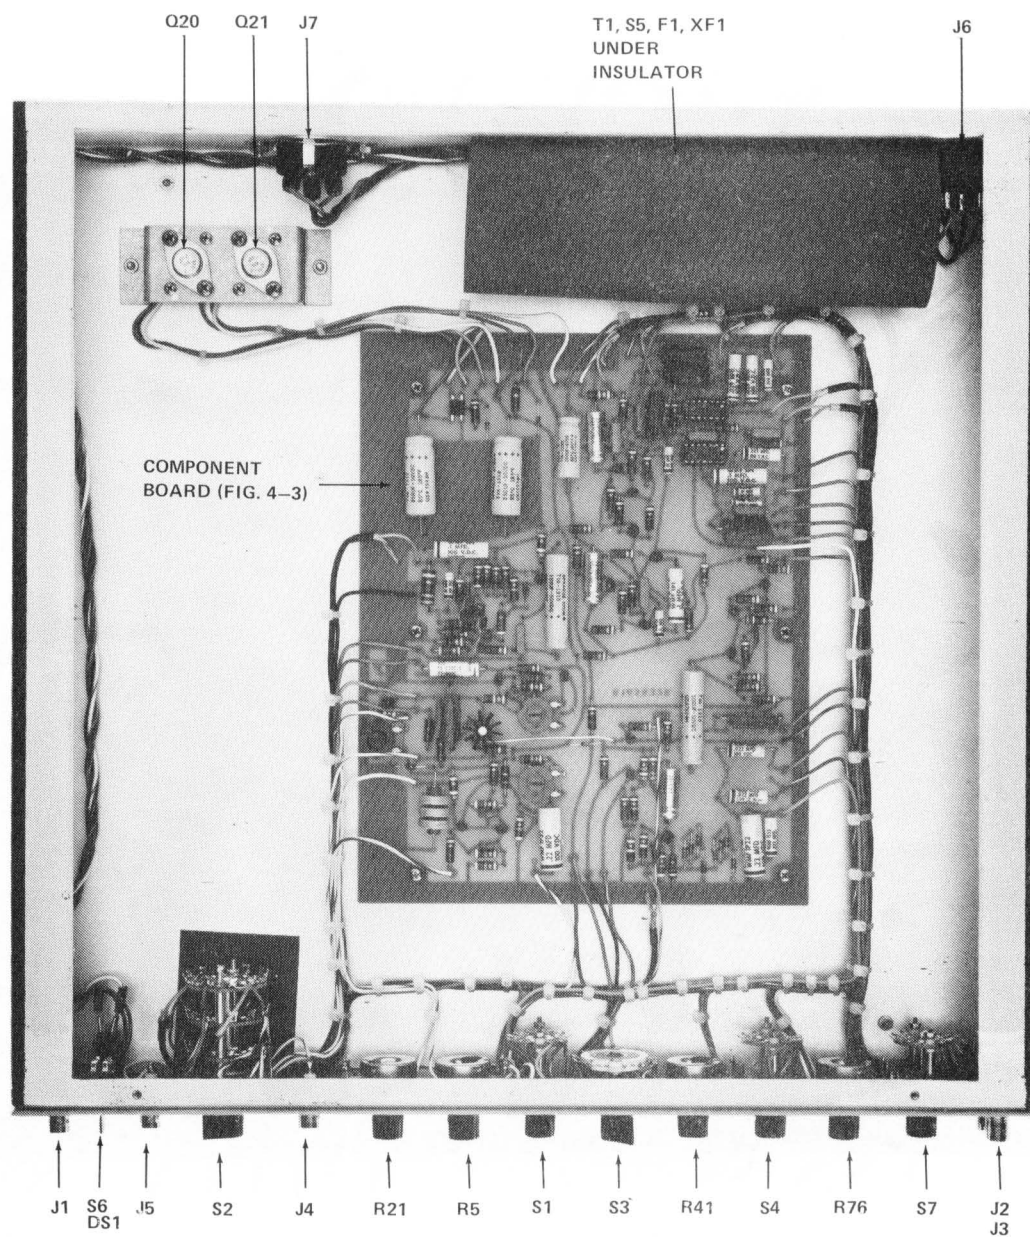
Top View of Chassis, Model 1020A Modulator
